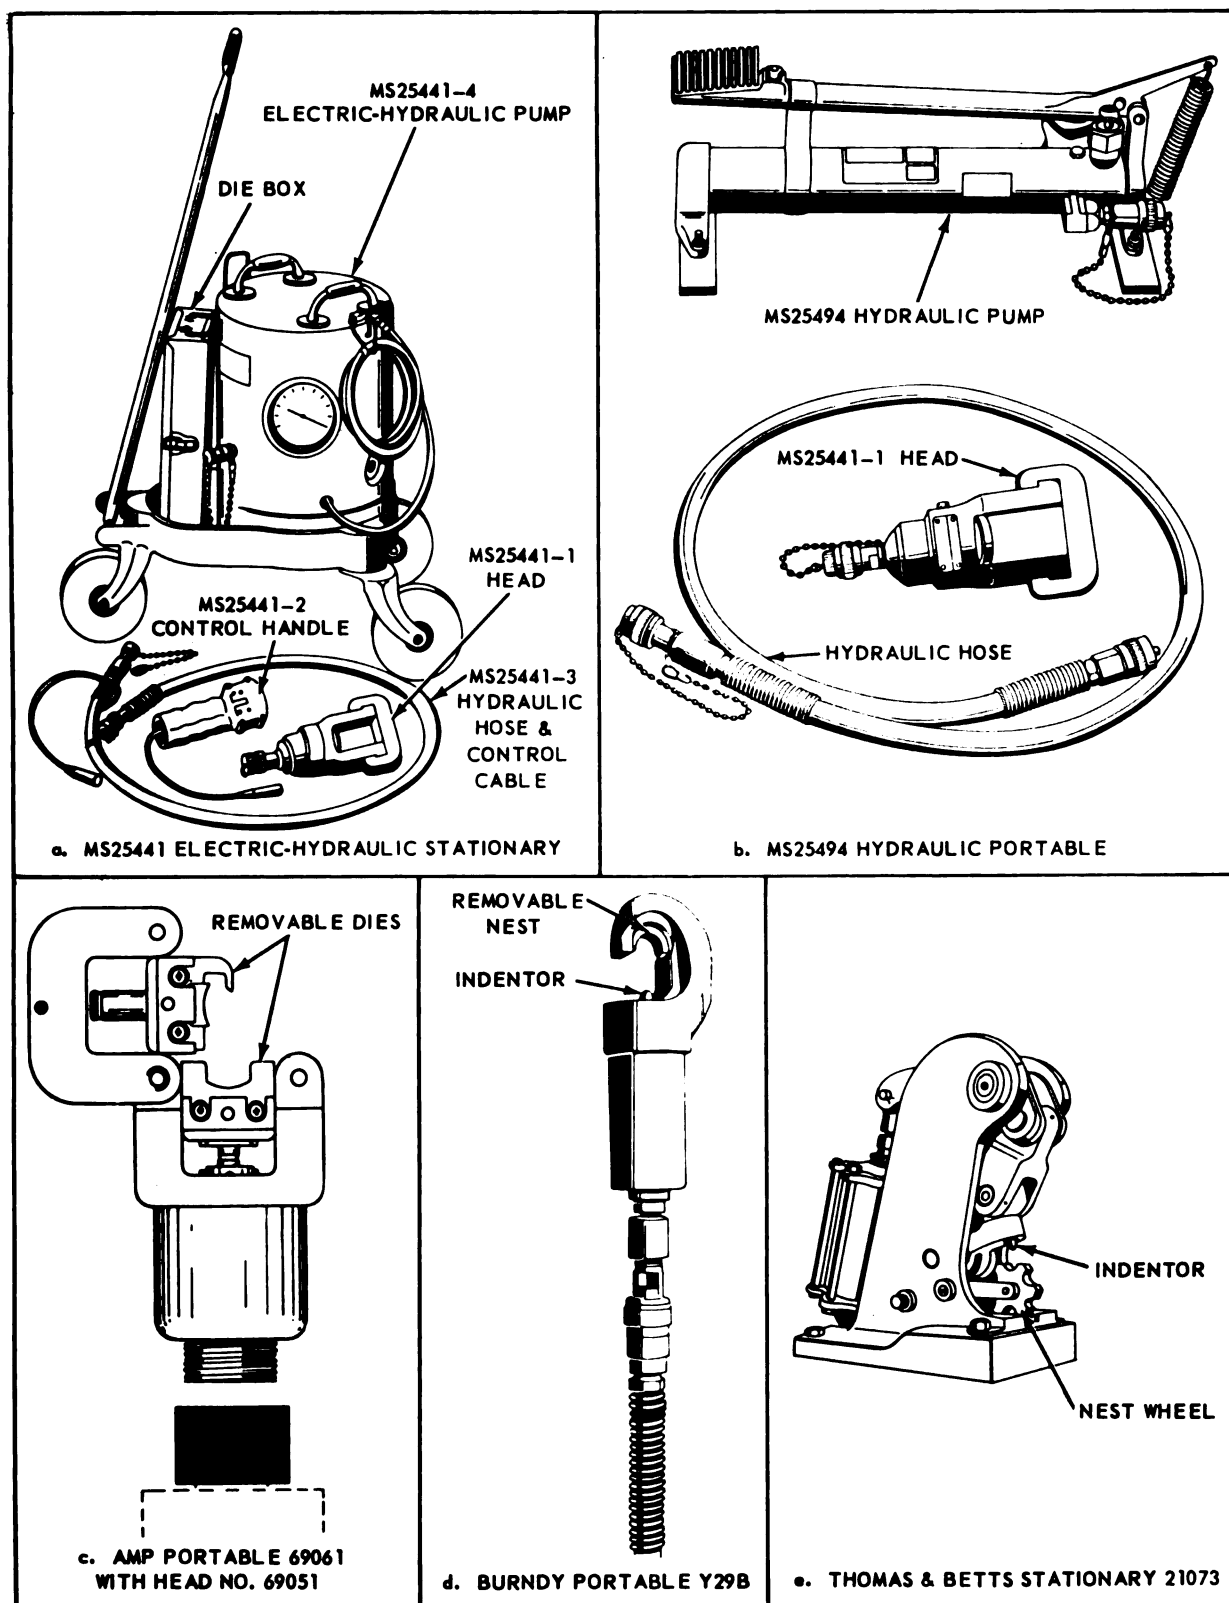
Tools - Power Crimping - Large Copper Terminal Lugs
